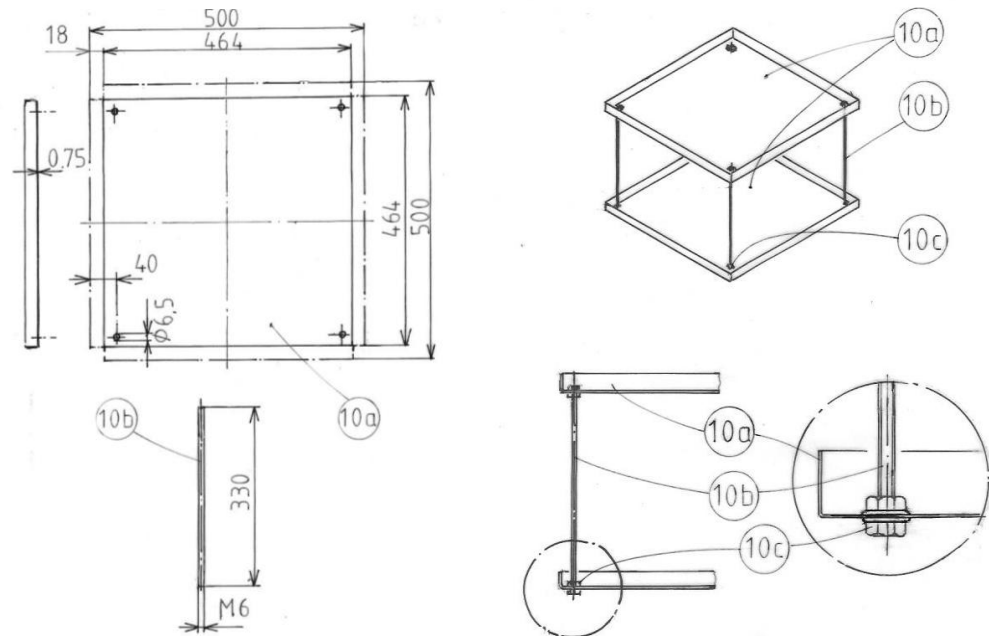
Drawings for a simple rack for supporting a Ben-stove, according to the list of pieces and the description on page F3.
